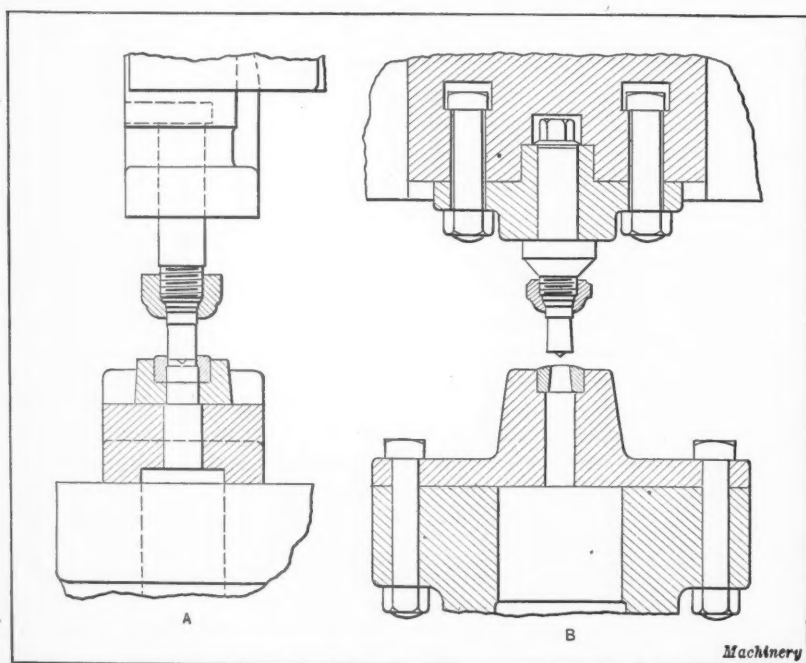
Sectional Views of Punches and Dies, having Die-blocks like those shown in Fig. 1
